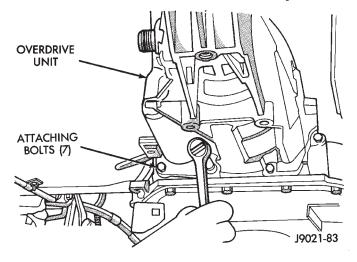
Removing/Installing Overdrive Unit Attaching Bolts
